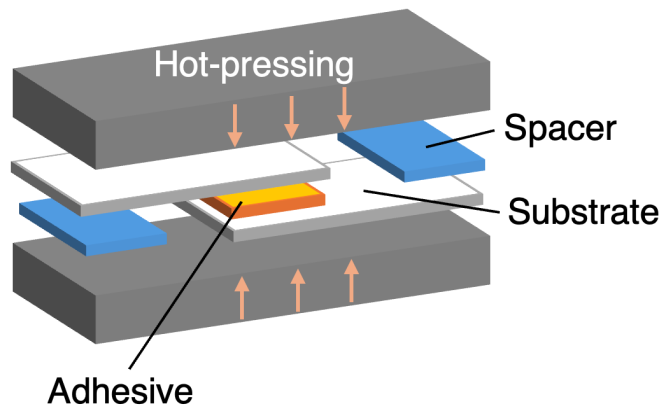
Hot-pressing apparatus used for specimen fabrication.
